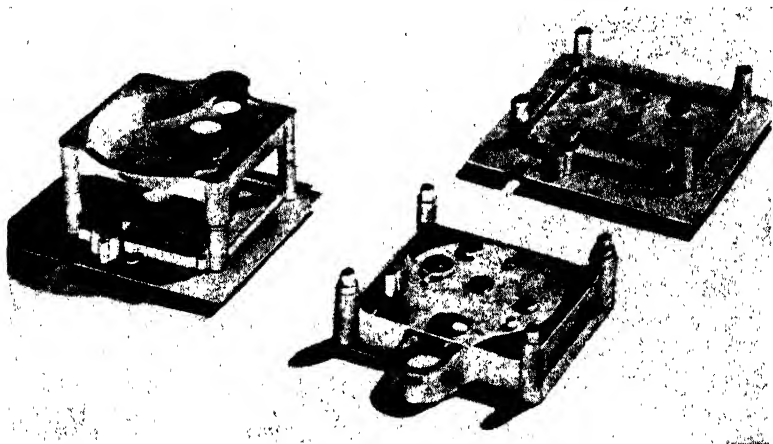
Two die castings form this clock frame, of which hundreds of thousands were produced. The hollow spacing members, all bearing bosses, recess for a lamp, and various projections and lettering on the back of rear plate are all integral parts of the die casting. These replace many parts of the usual stamped plates assembled with parts made in the screw machine common in clock construction.
